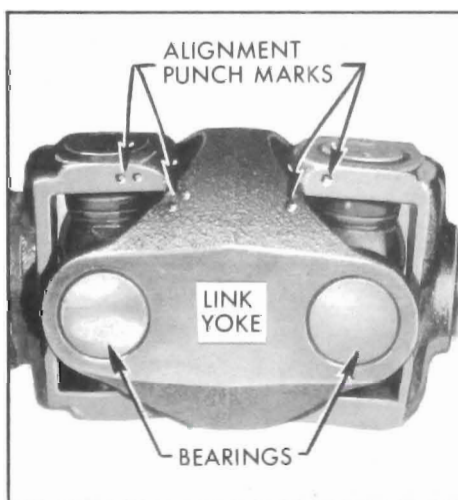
Link Yoke Showing Alignment Punch Marks
